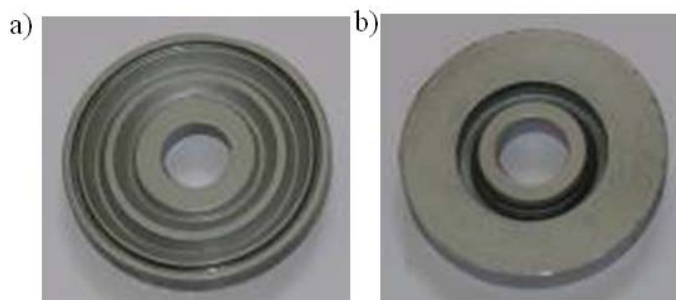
a) Simply supported fixture, b) Clamped supported fixture
